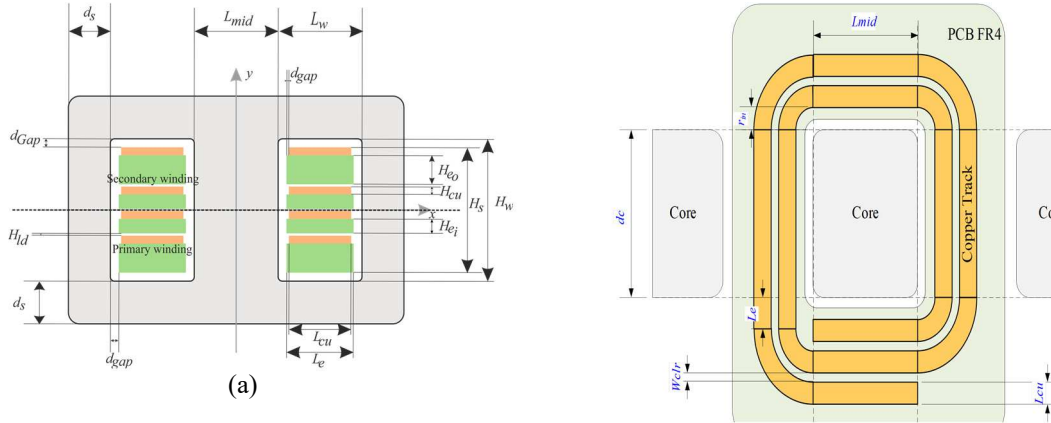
Geometry of the MFT planar transformer: (a) core front view, and (b) one-layer PCB construction.
